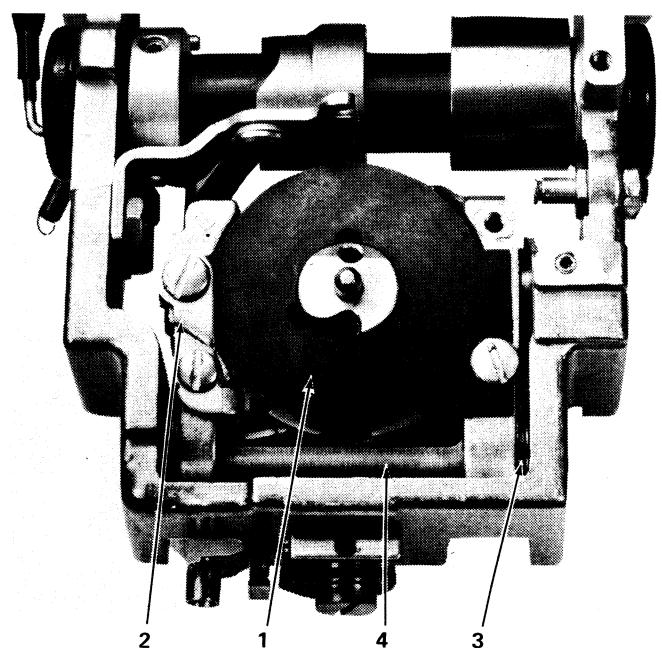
Carrier and Rocker Removal (Bottom of Carrier)
